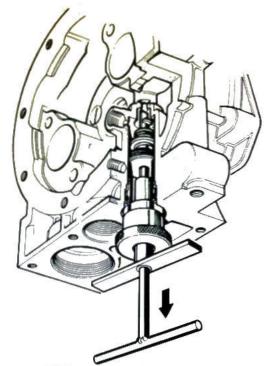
REMOVAL OF RELIEF VALVE BODY AND SLEEVE
